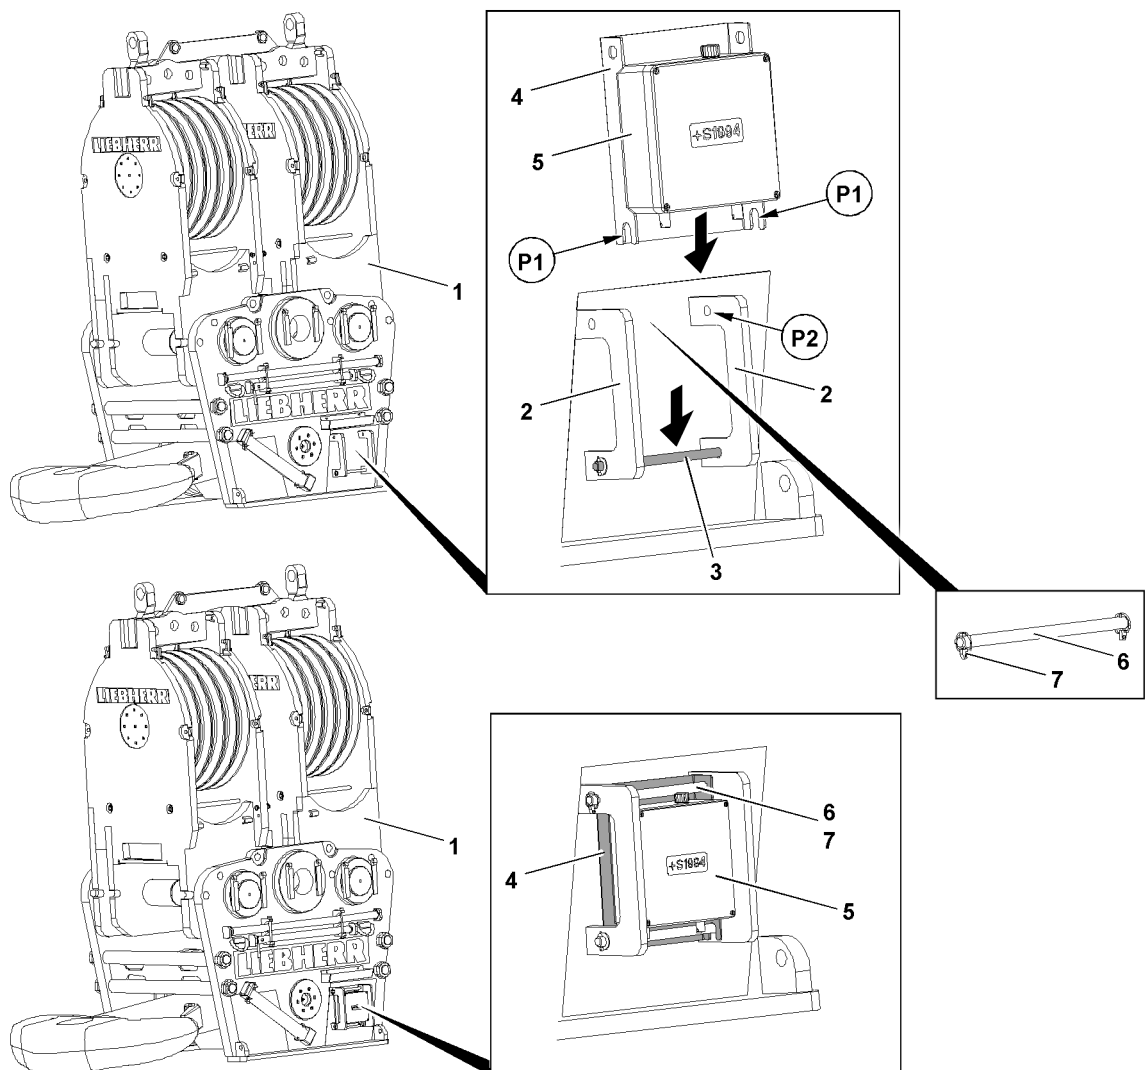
Assembly of the radio sending unit 5 on the hook block
